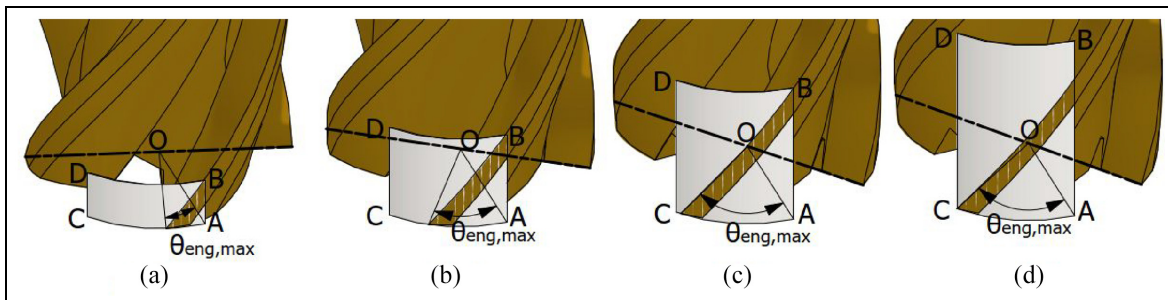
The maximum engagement angle between the tool and workpiece at different axial depths of cut using 1 mm trochoidal step and 600 mm/min feed rate, and (a) 2 mm, (b) 4 mm, (c) 6 mm, and (d) 8 mm axial depths of cut.
